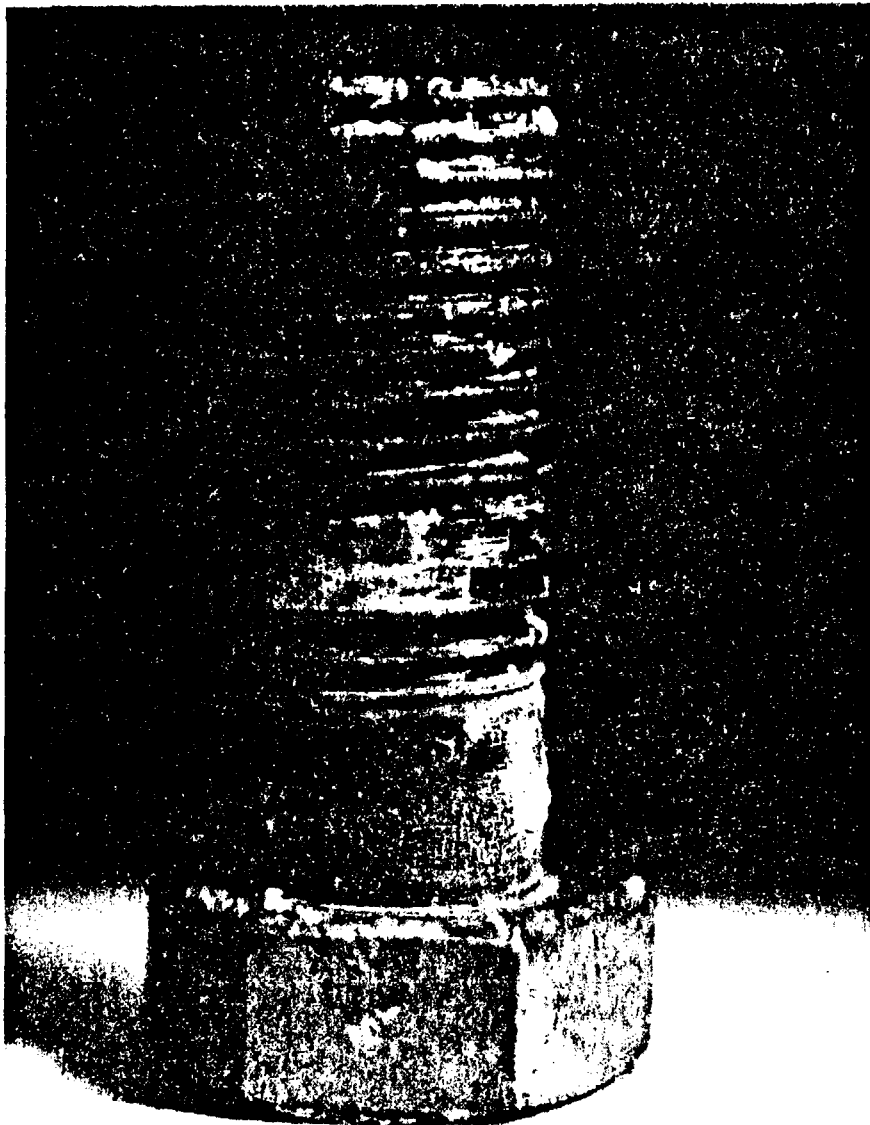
Sodium remaining on screw threads of a CEDI pump bolt after cleaning.
